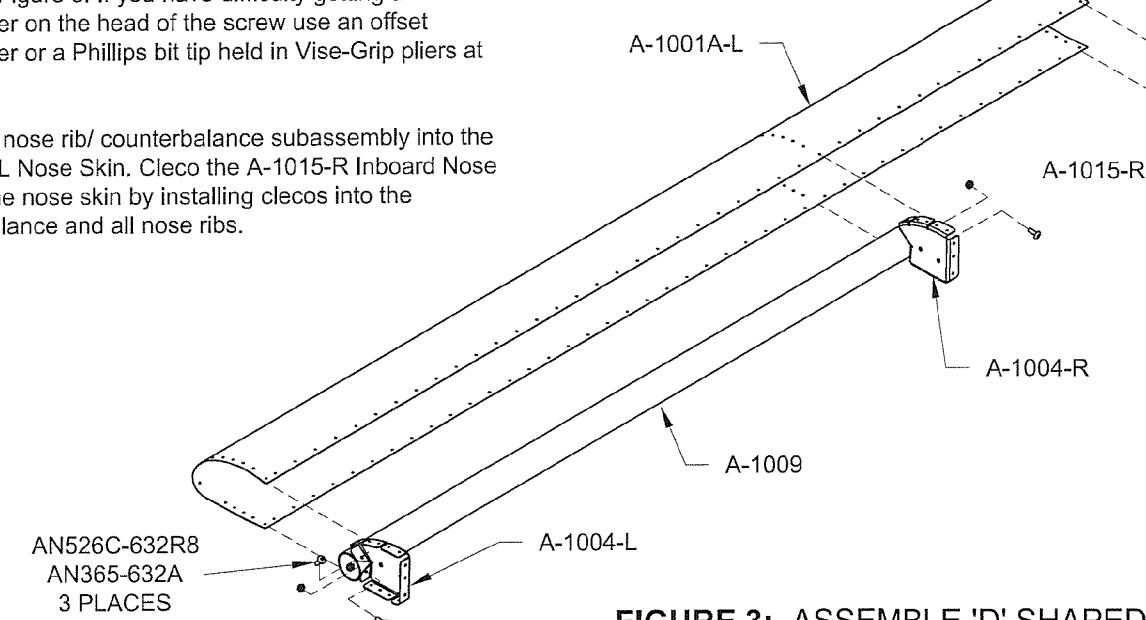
ASSEMBLE 'D' SHAPED CELL
